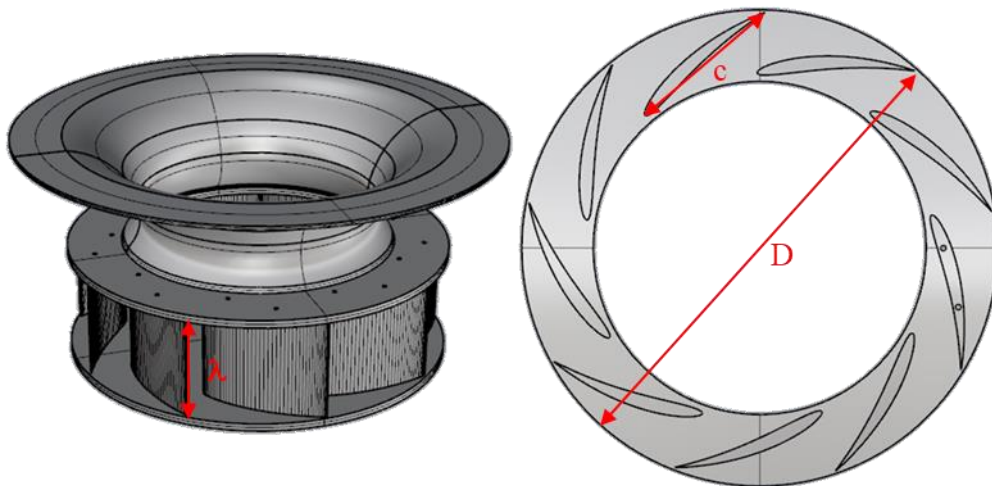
3D view of roof fan unit (left) and top view of the disk of the impeller with blades (right)
